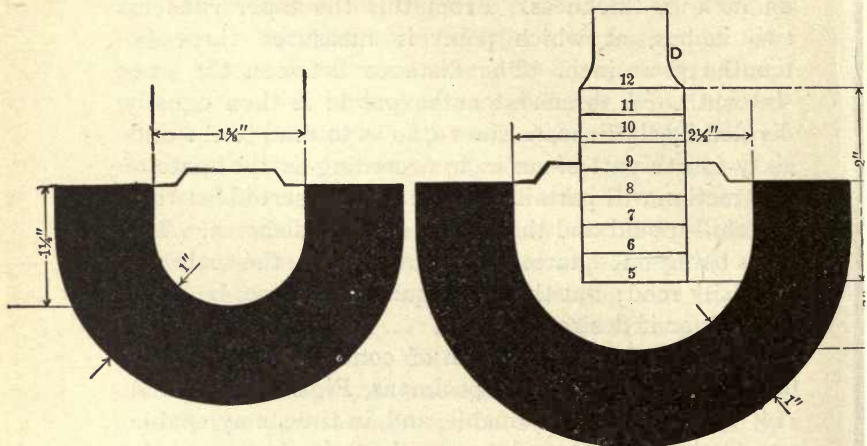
CROSS SECTION OF SMALL AND LARGE CHILL PIG MOULDS.
